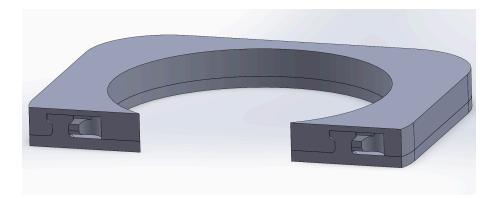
Cross-Section Solidworks View of Sliding Snap Fit
